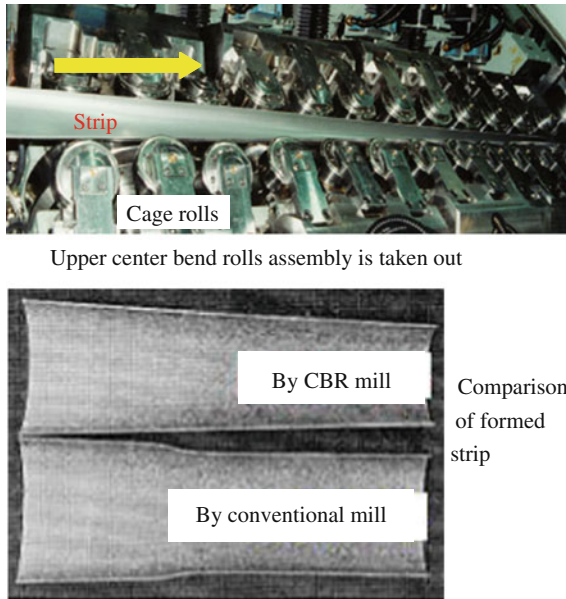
Appearance of formed strip in the cage roll section [6, 7, 9]
